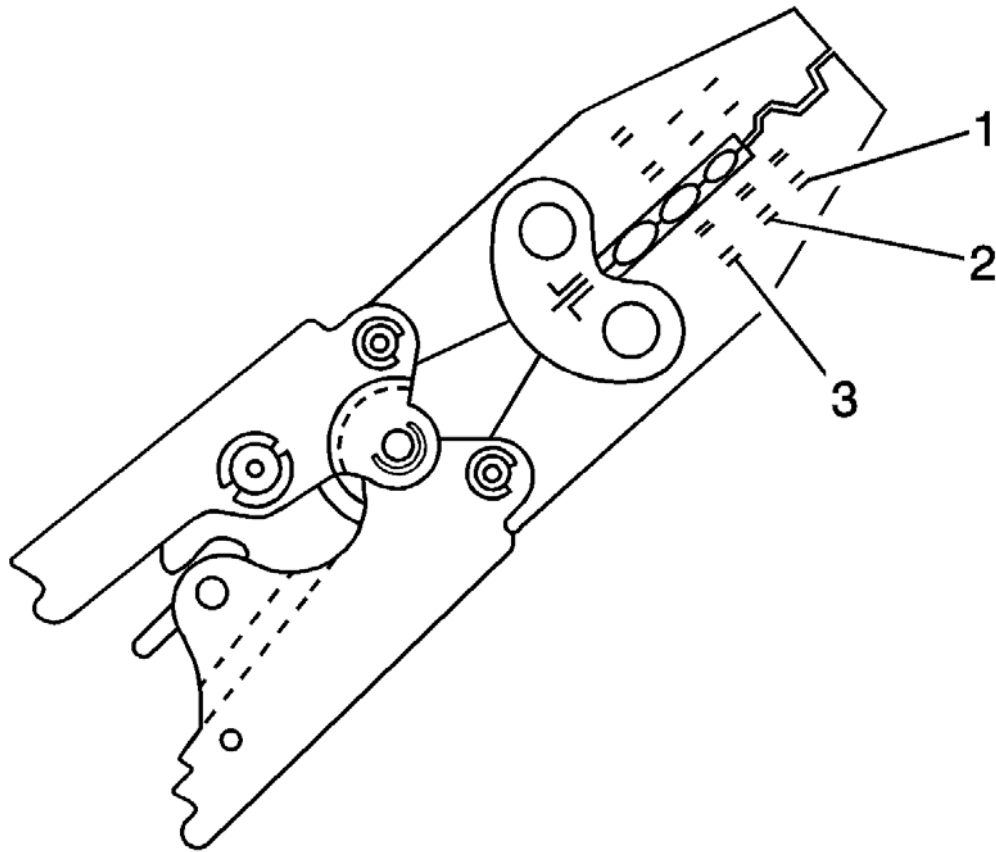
Splice Sleeve Crimping Tool With 3 Crimp Nests
